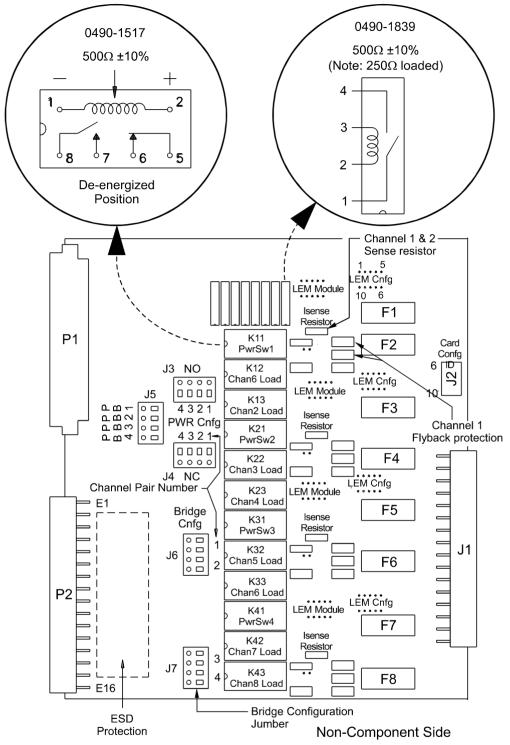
HP E6175A 8-Channel Load Card Component Locator (Rear View)
